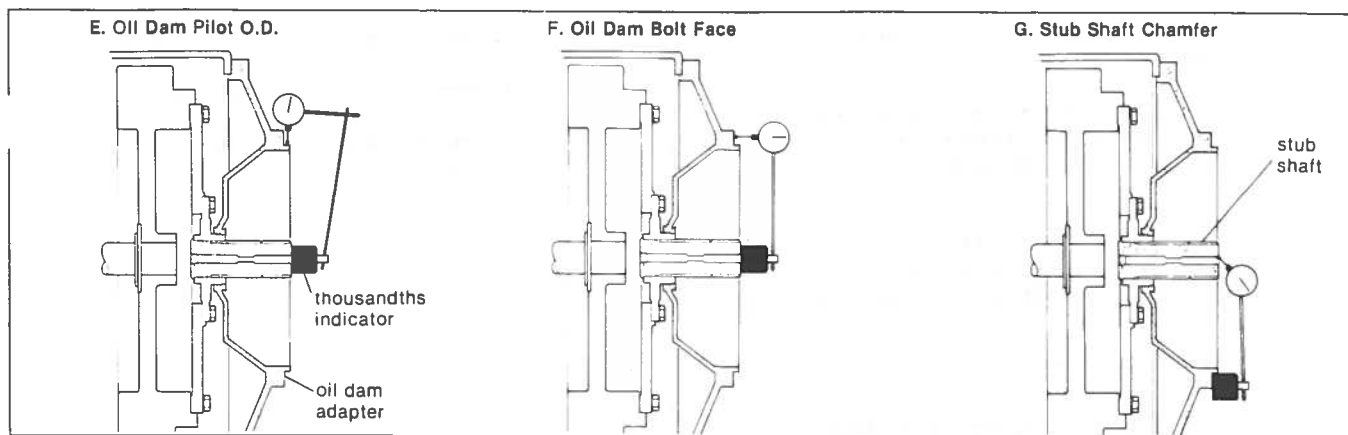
Dial Indicating Oil Dam and Stub Shaft.
